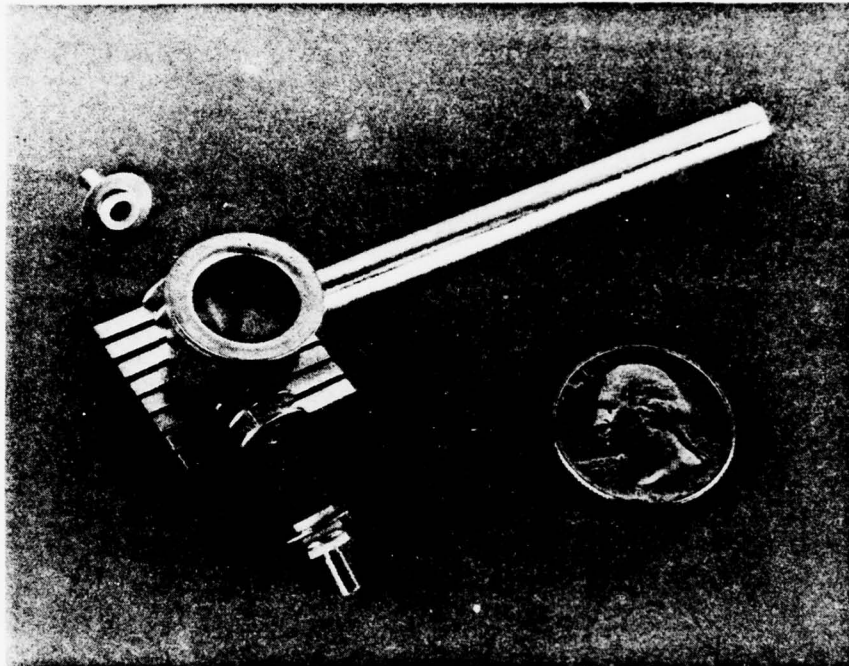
Picture of partially assembled millimeter helix tester with viewing window, dc-couplers and heat risers.
